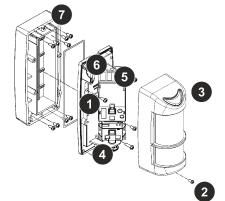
1 – bracket screws, 2 – locking screw, 3 – front cover, 4 –adjustment knob for lower PIR (PIR2), 5 – PCB holder, 6 – tamper contact 7 – mounting backplate
